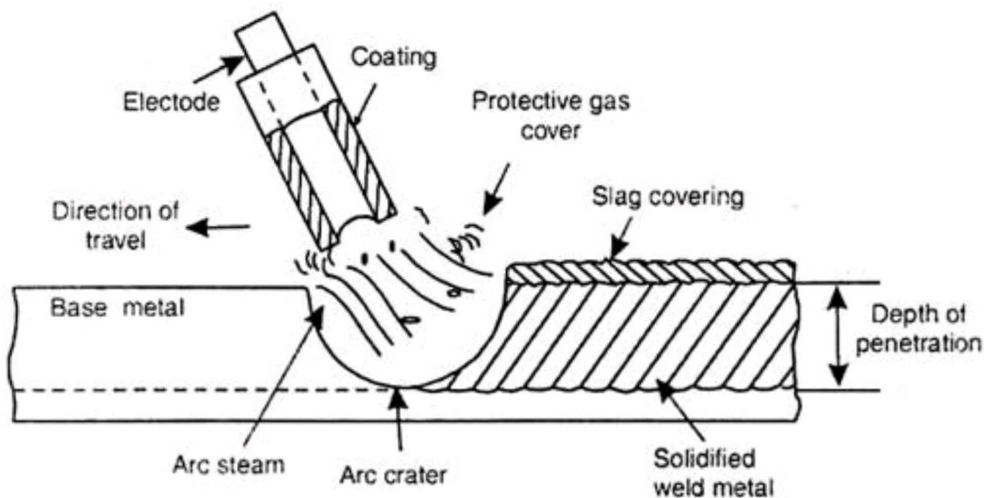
Cut away view of the arc welding with a coated electrode.
